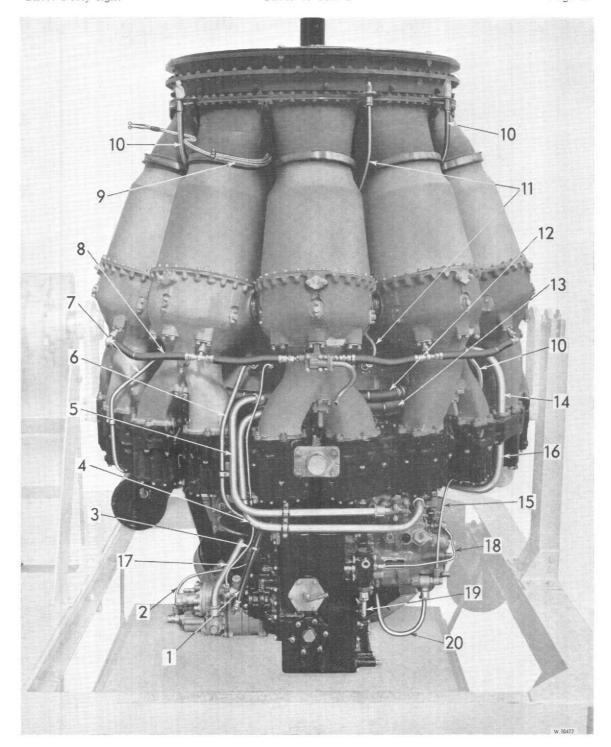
Disposition of pipes on underside of 48 Mk. 2 engine.
